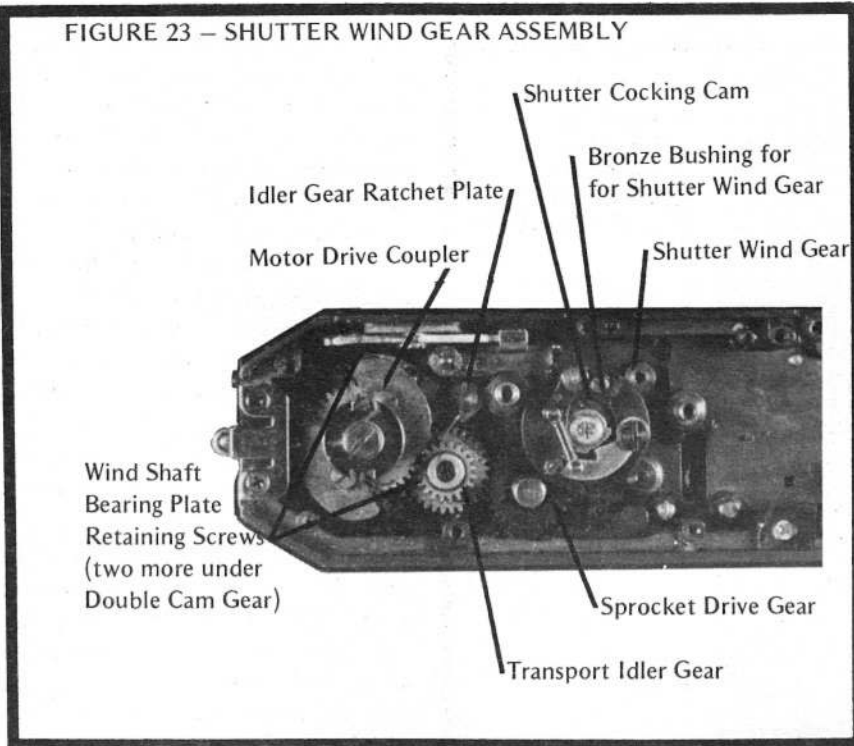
SHUTTER WIND GEAR ASSEMBLY
